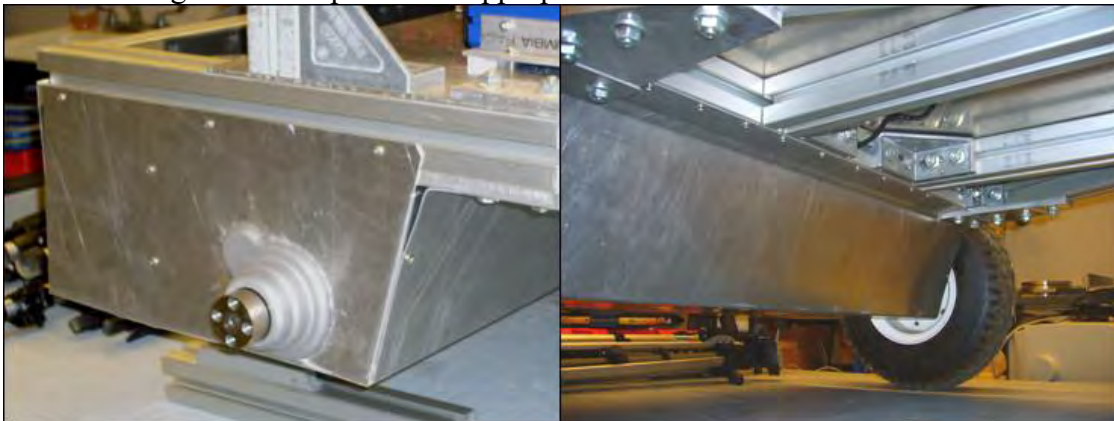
Protective shrouding, side shrouding (left) undercarriage shrouding (right)
